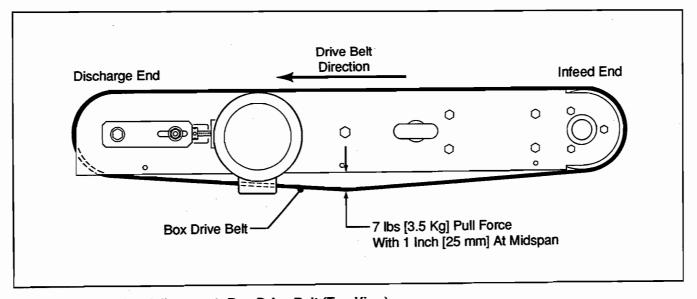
Tension Adjustment, Box Drive Belt (Top View)
